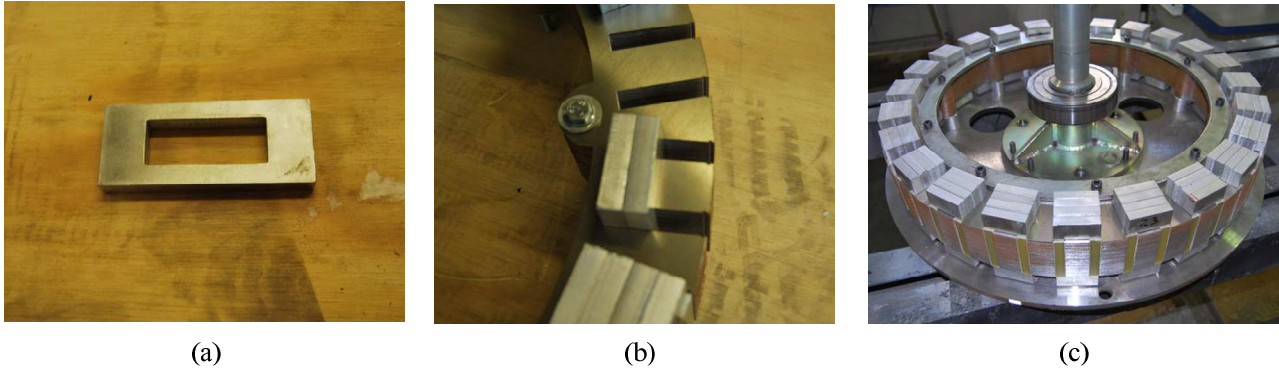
(a) Solid aluminium bar coil; (b) bar coil inserted in new IG rotor stack; (c) assembled IG cage-rotor.
